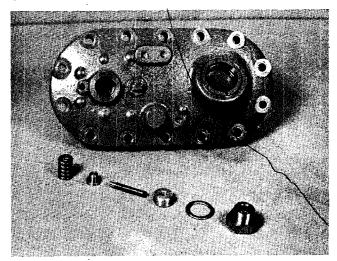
Bellows Spring and Adjusting Screw Assembly.
